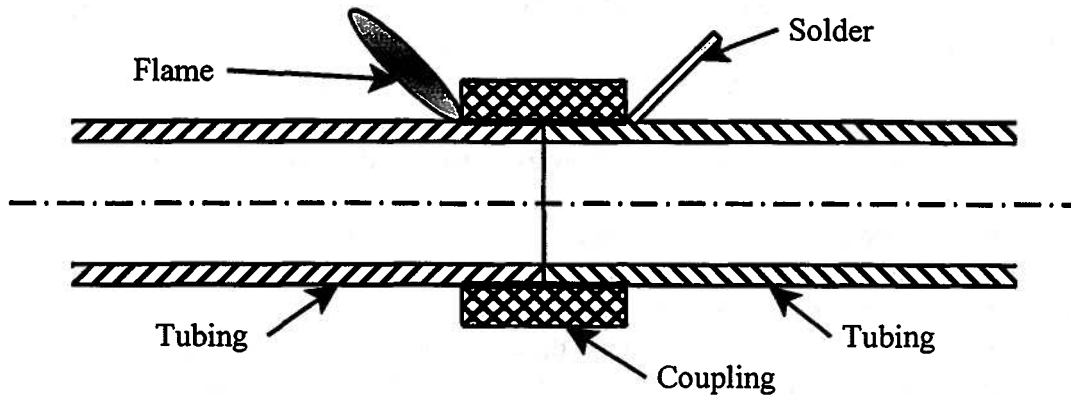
P.4 Cross-section of Copper Tubes Joined by Soldering
